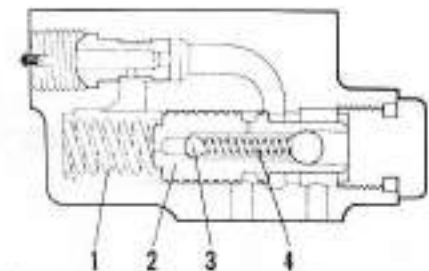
Cross-sectional view of flow control valve spool and pressure relief valve assembly. Pressure relief valve is not serviceable.
